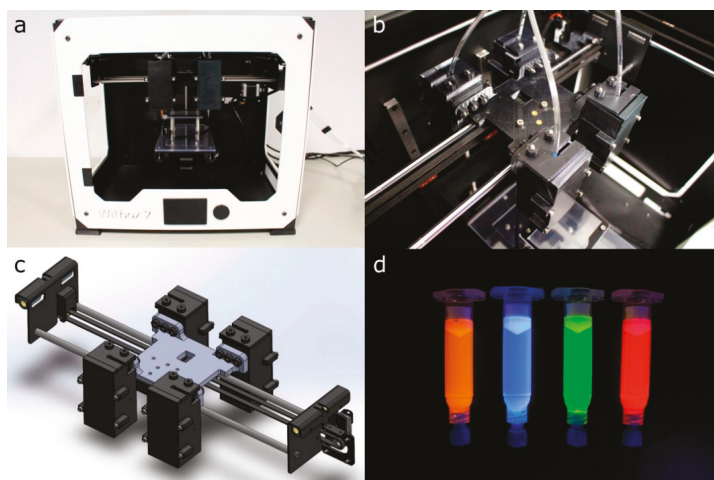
(a,b) general and detailed view of the modified Witbox 2 3D printer with four bioprinting printheads; (c) 3D CAD design of the 3D printer x-carriage; (d) 5 mL syringe barrels loaded with dyed P407 hydrogels.
